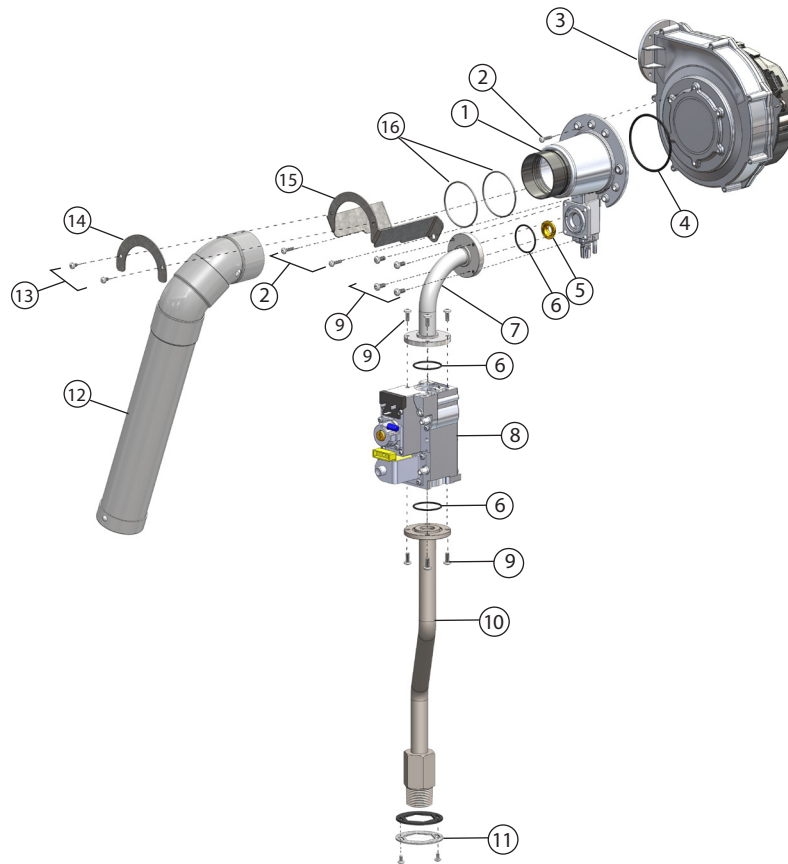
Prestige 299-399 Solo - Burner conversion kit
